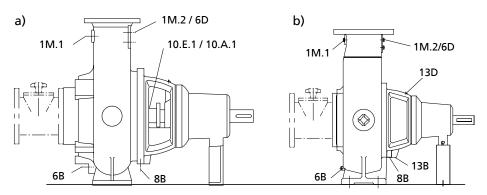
Auxiliary connections: a) Pump with gland packing, b) Pump with mechanical seal
